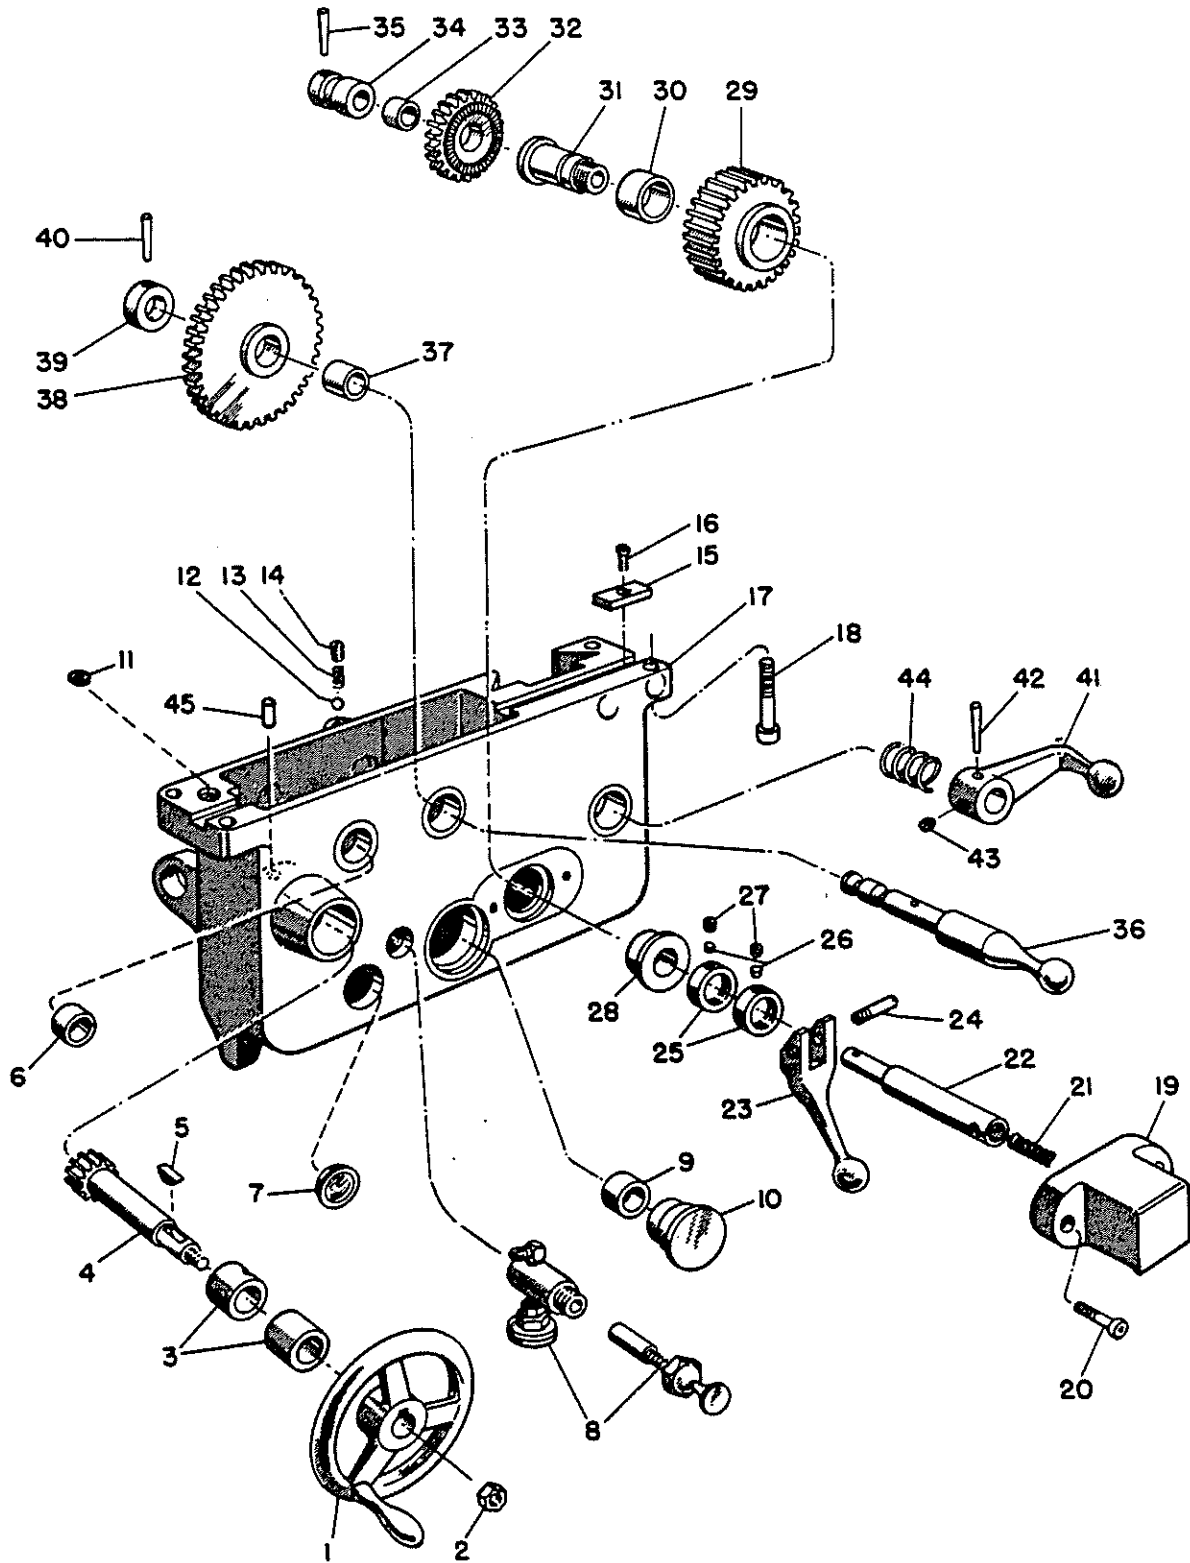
Apron Assembly (Front) 10" and 12 1/2"
